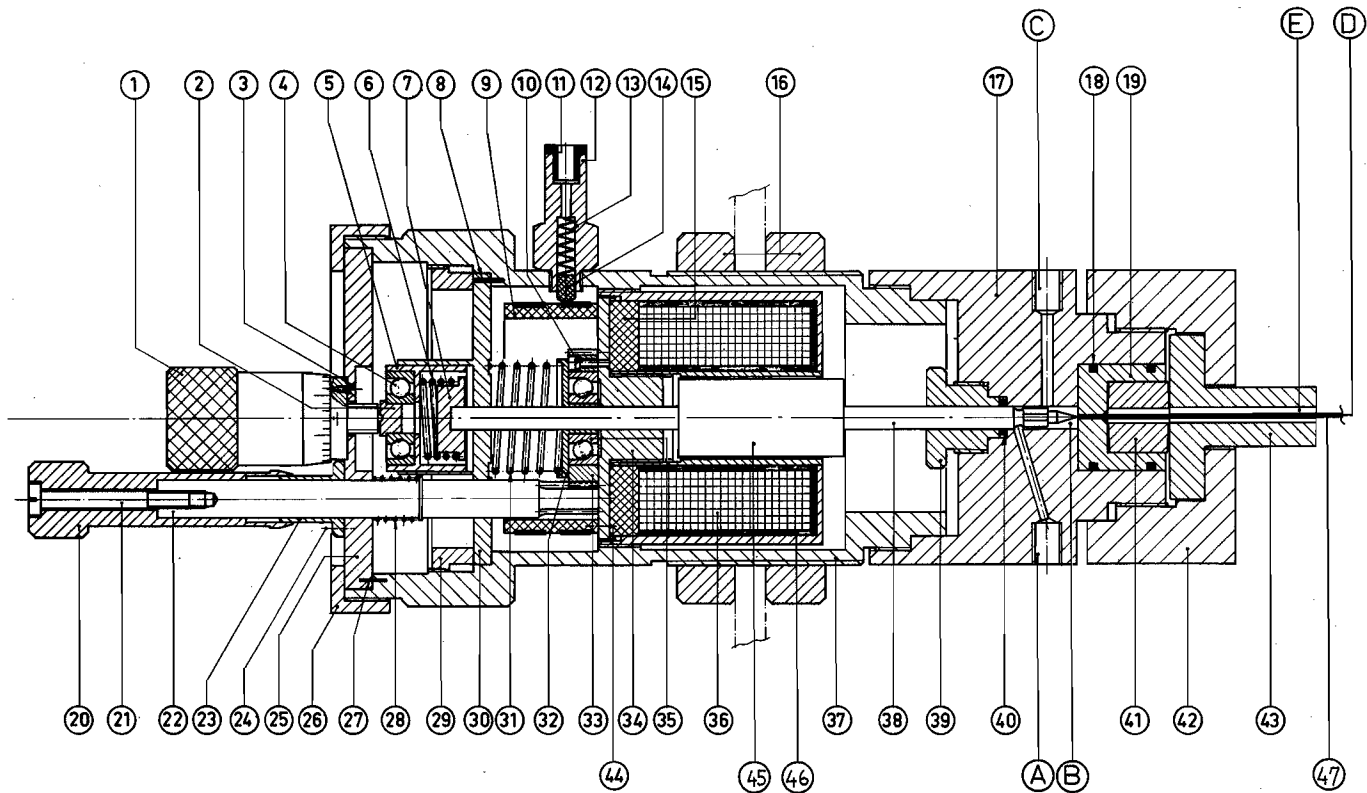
Constructional drawing of the high-pressure electro-magnetic sampling valve.
